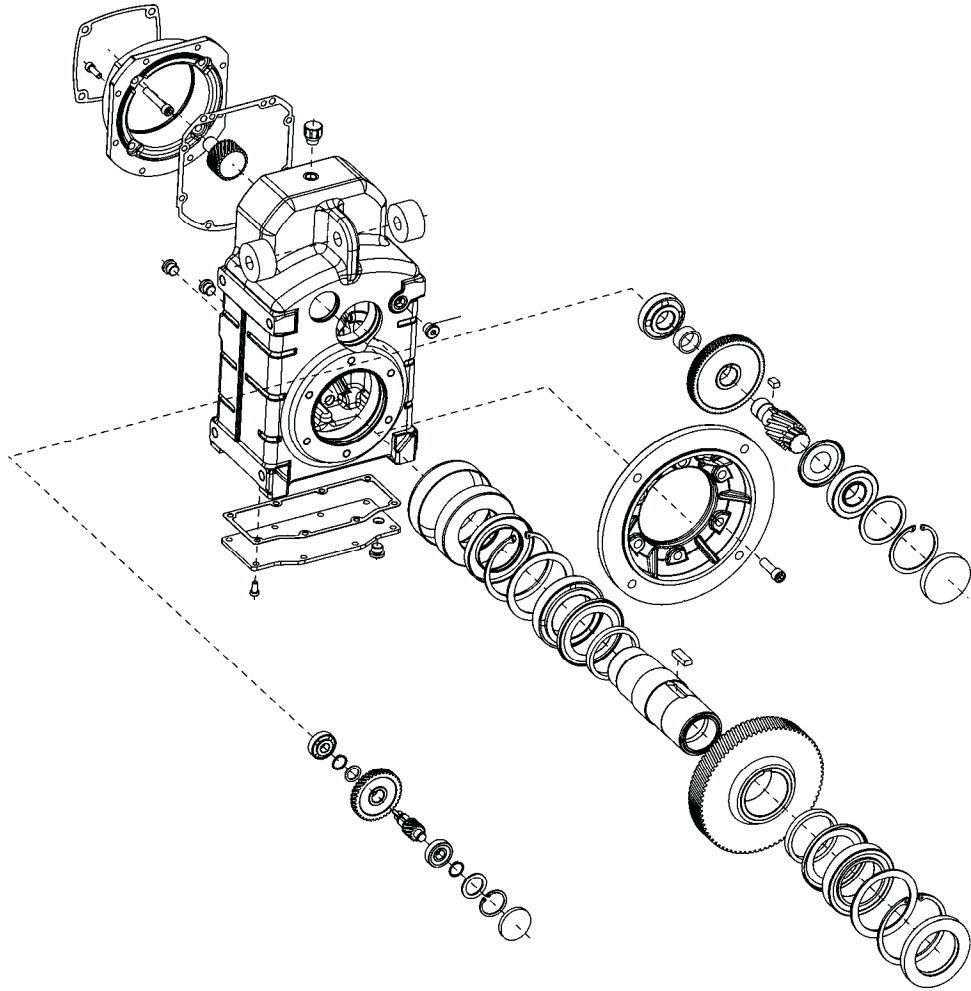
The way the nacelle trainer gearbox is assembled (courtesy of Flender/Siemens).
